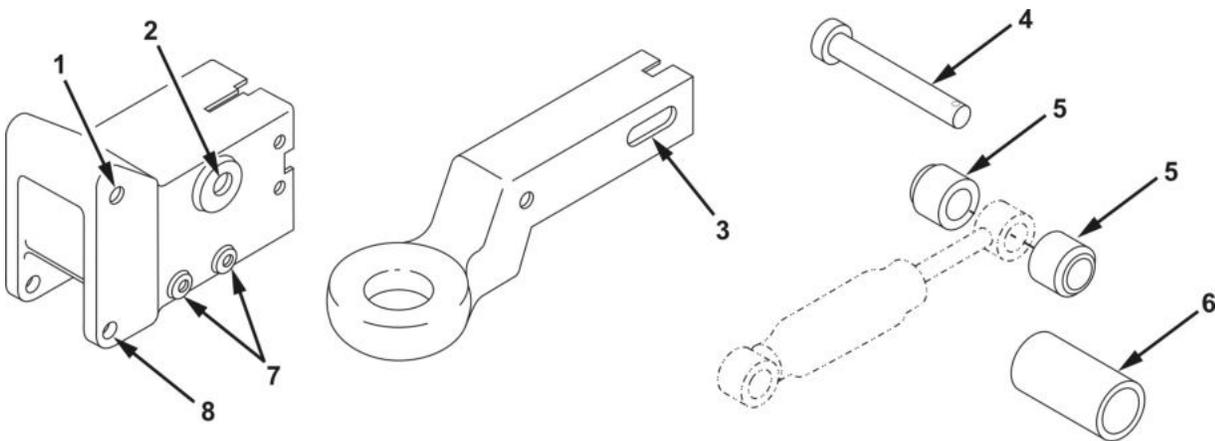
Hydraulic Brake Actuator Cleaning and Inspection.
